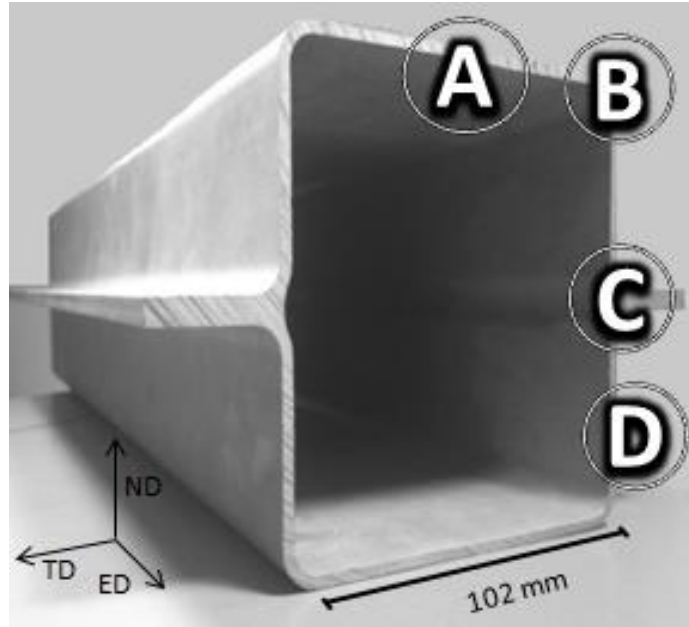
Investigated extrusion welding locations of the AM30 profile
